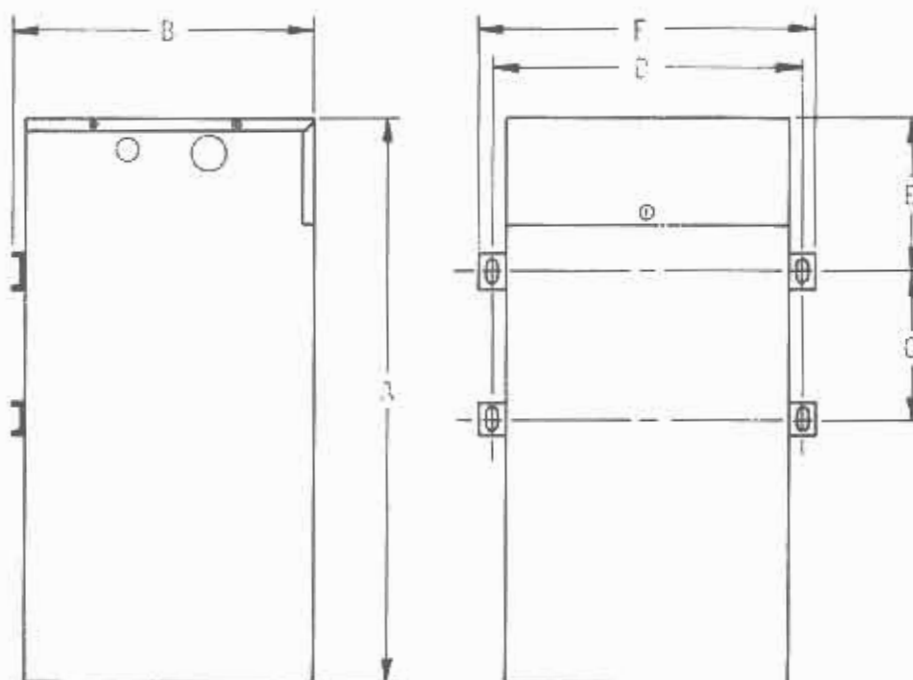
POWER CONDITIONER DIMENSIONAL DRAWINGS
